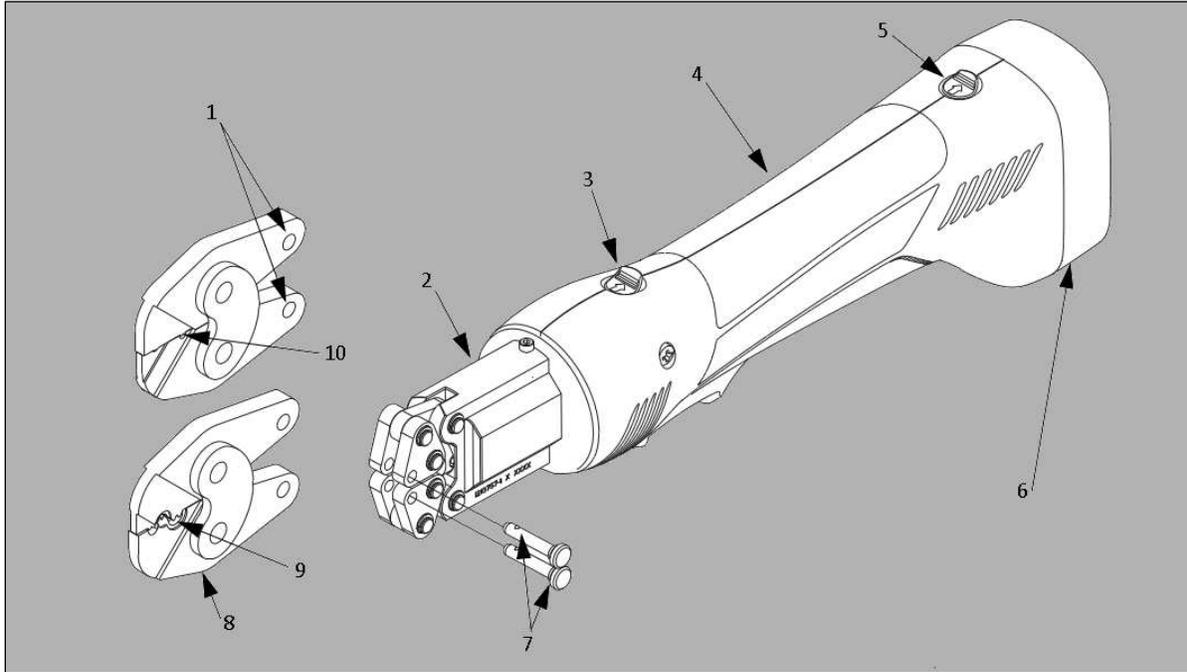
Double Action Battery Powered Hand Tool Kits Assembly 2217483
